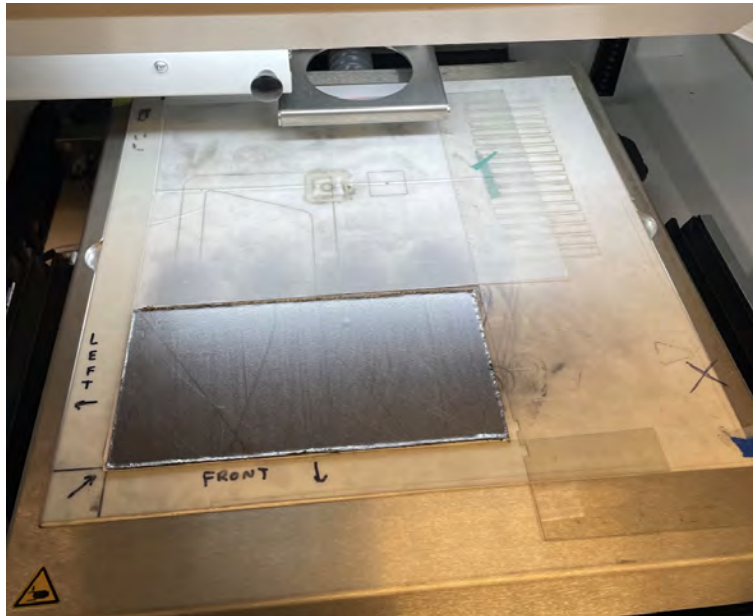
A blank gasket sheet loaded into the LPKF laser engraver. It is surrounded by static plastic sheets.
